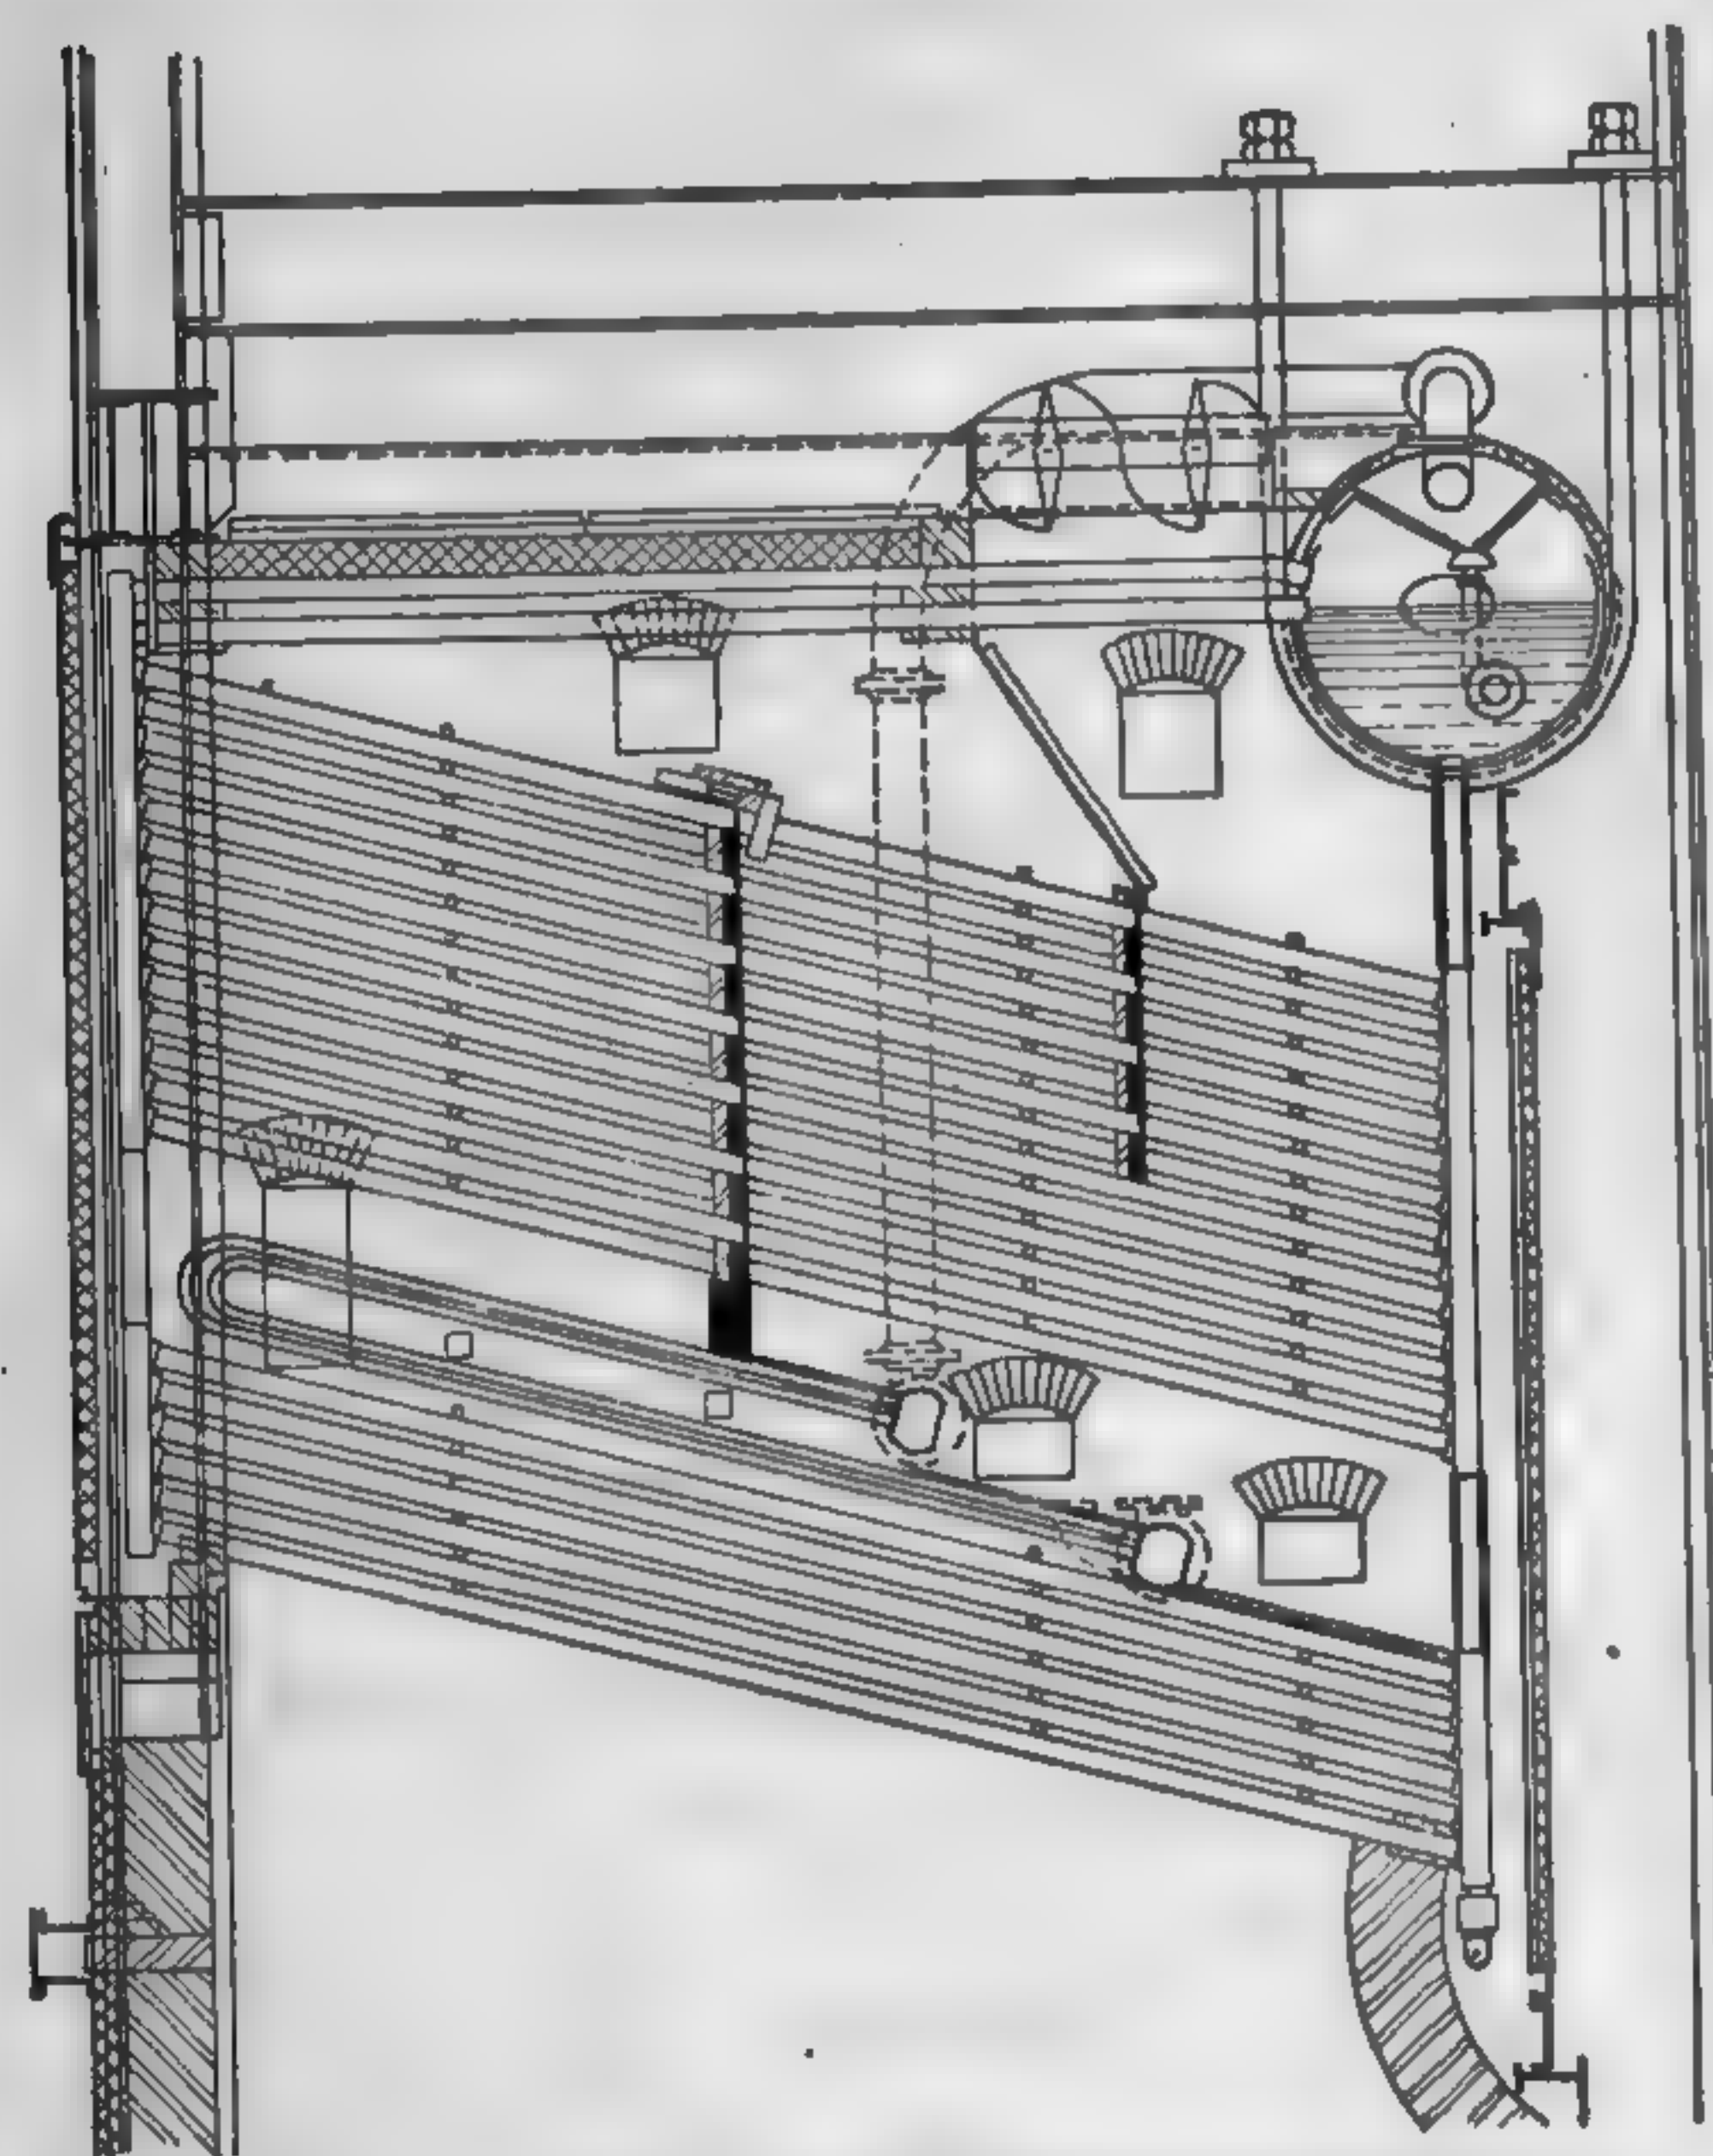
Babcock and Wilcox Superheater — Located Between Tube Sections.
